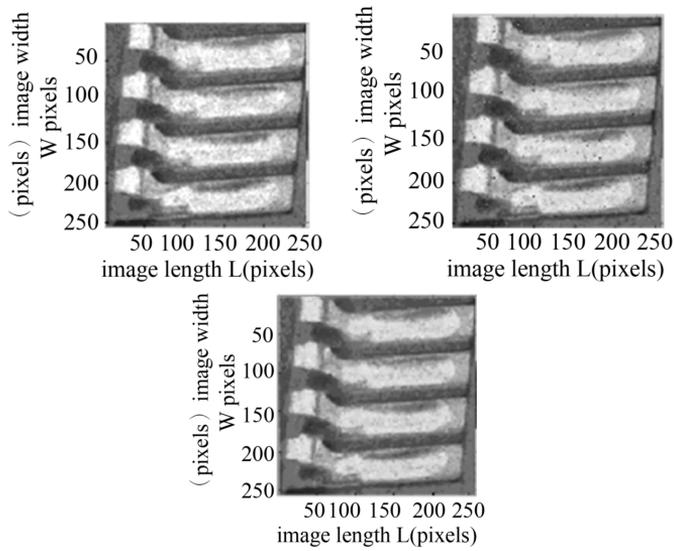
Uncertainty workpiece disassembly results: left part up–median filter, right part up–skewness filter, bottom part–WPM method
